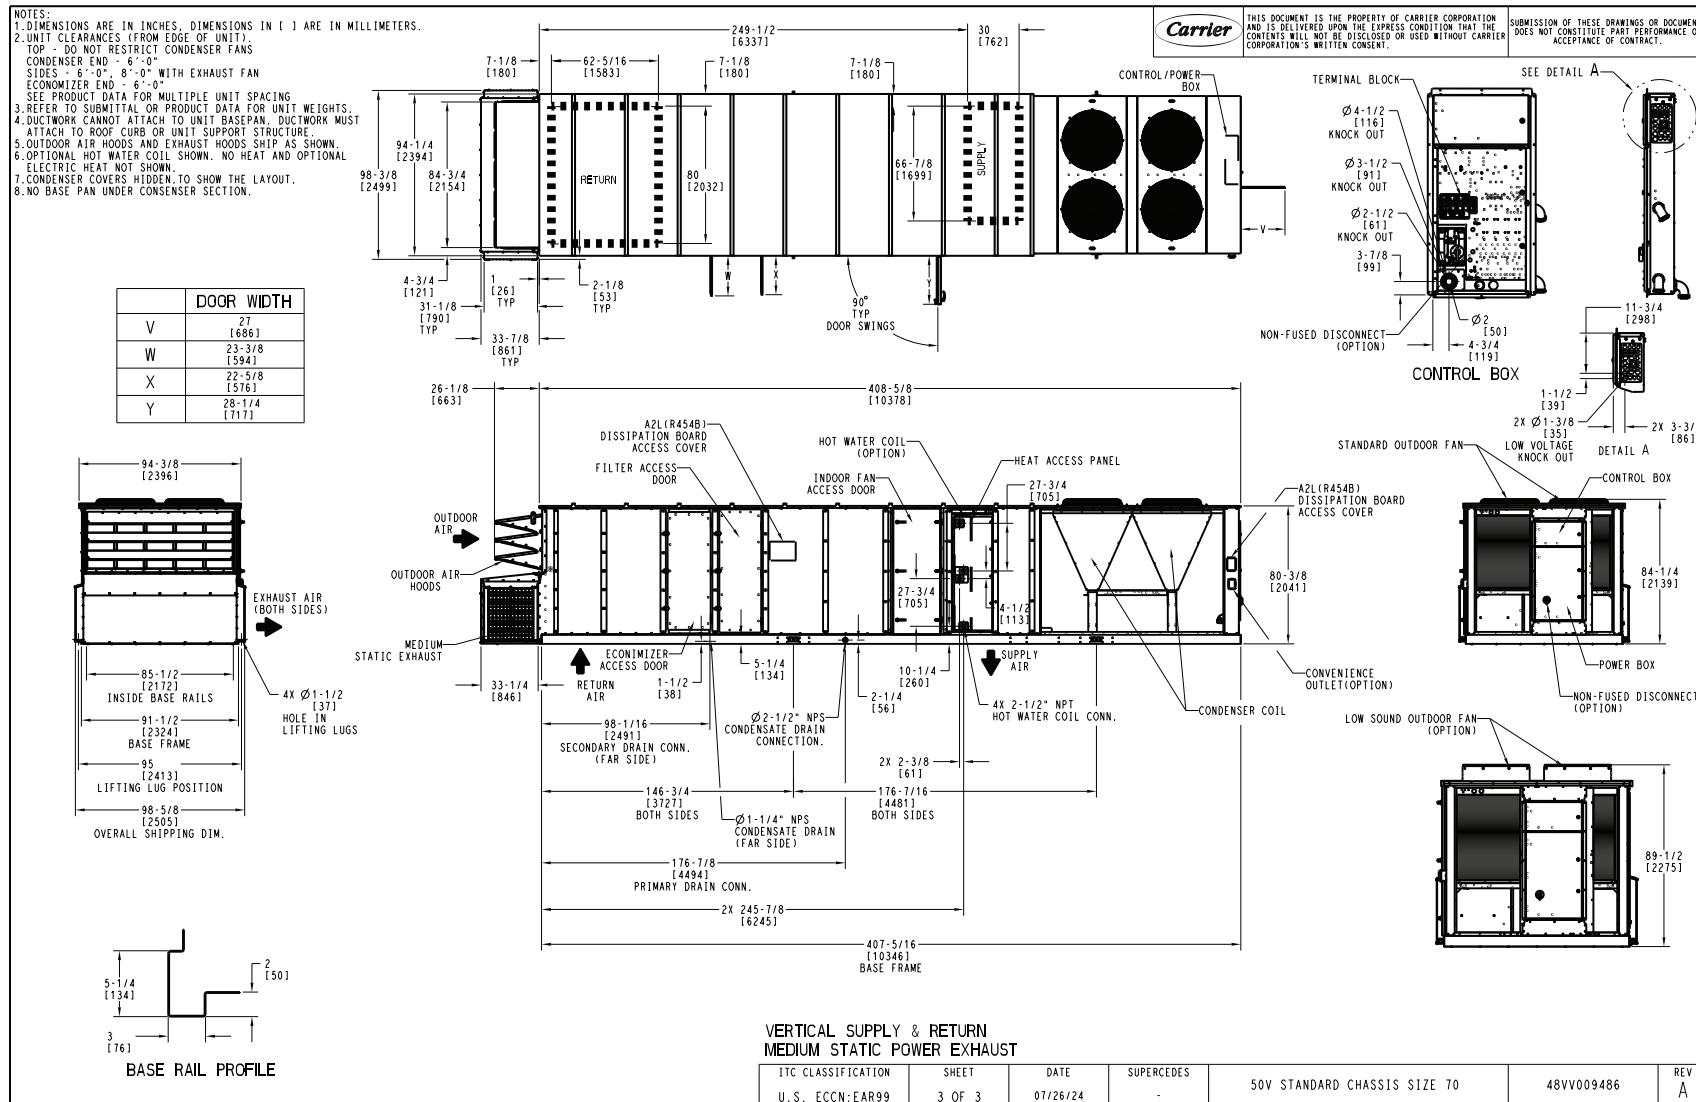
50V 70 Ton Standard Chassis (cont)
